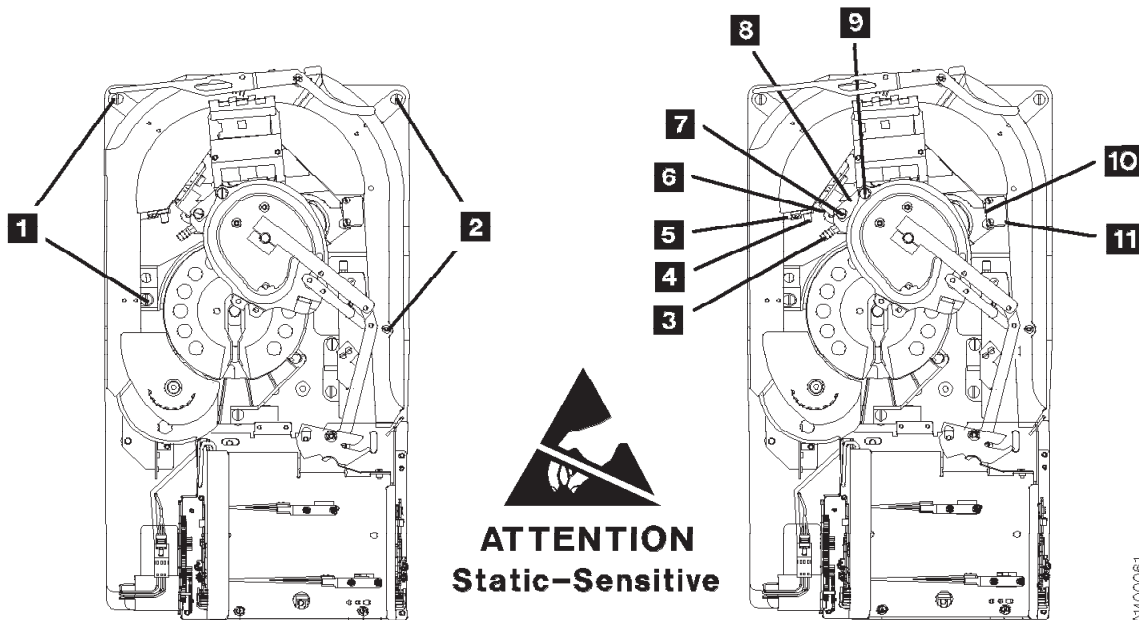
Tape Guides, Tape-Lifter Solenoid, Hoses, and Connectors
